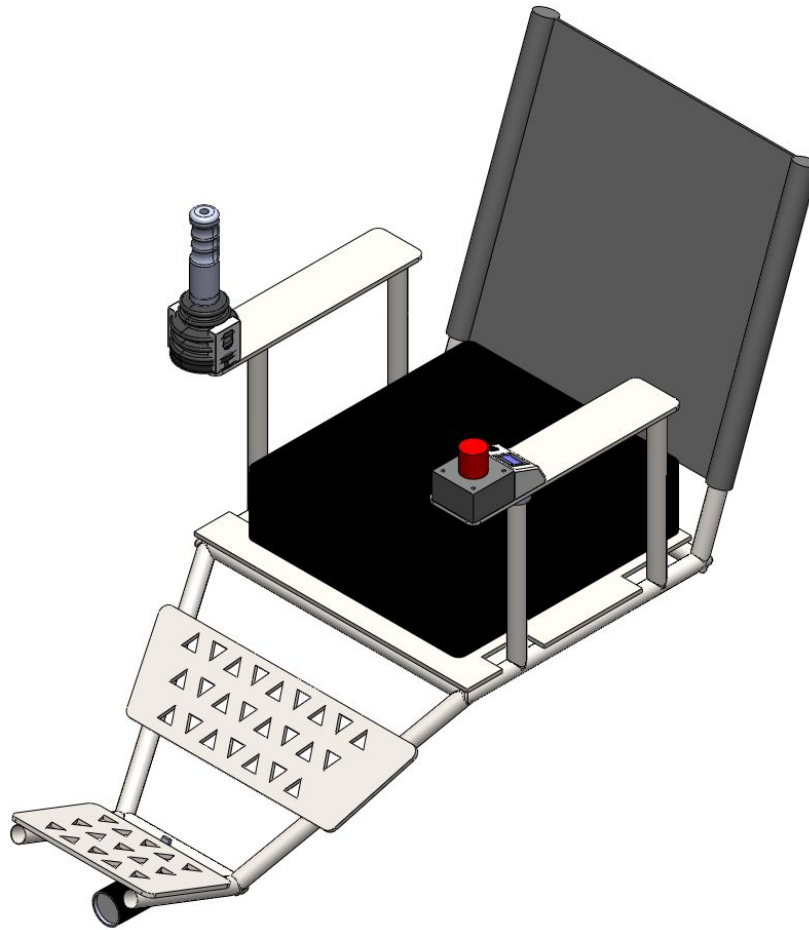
The chair consists of many welded steel tubes and 1/4" steel plate in order to provide a strong structure. Dimensions are anatomically driven and based off common wheelchair dimensions.
